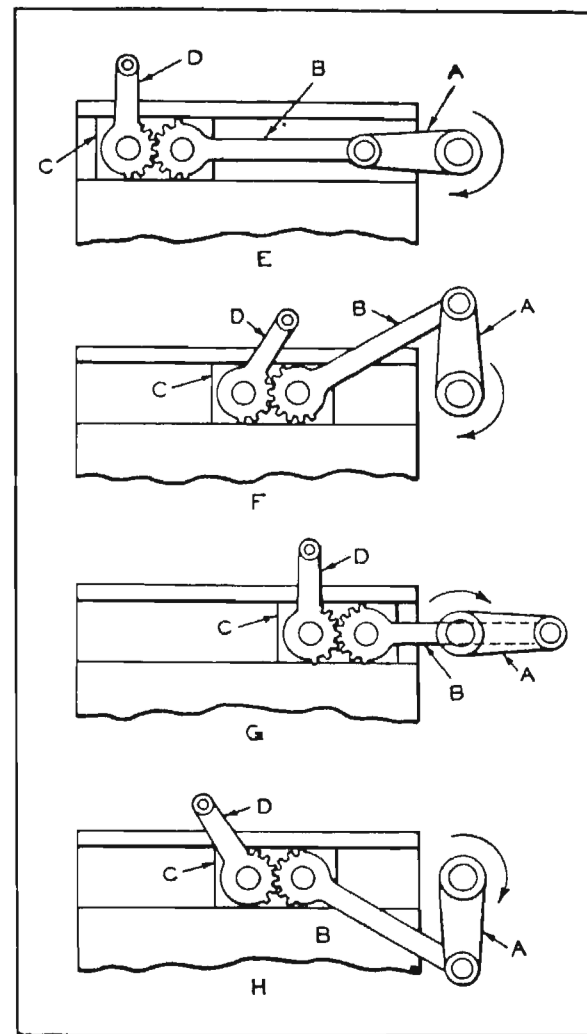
Crank-operated Slide with Segment Gear Lever which is Given Irregular Reciprocating Motion Through Segment Gear on Connecting-rod.
